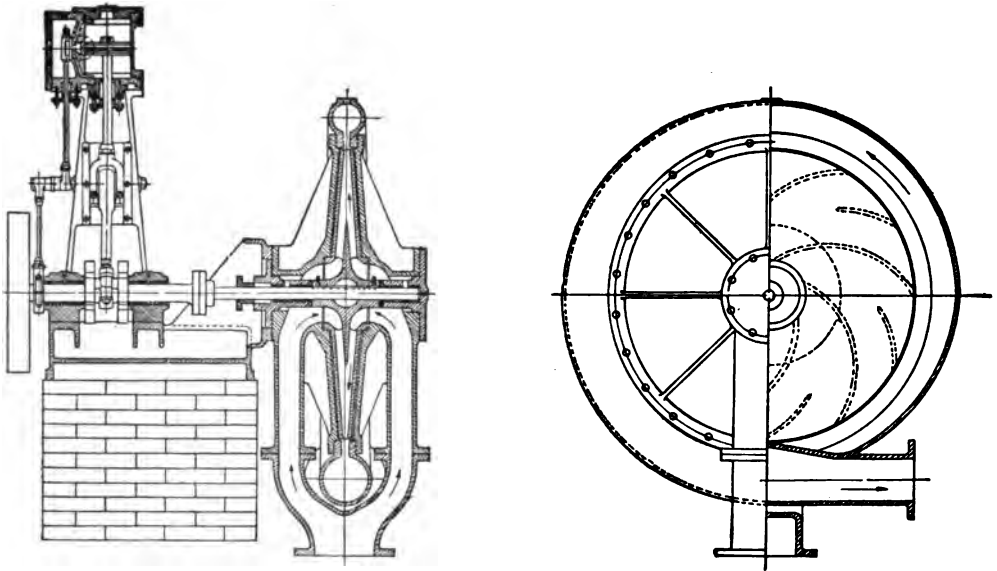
Centrifugal Pump Direct Connected to Vertical Engine of the Wheeler Condenser and Engineering Co.
